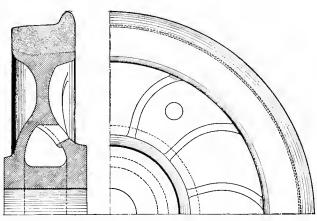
Fused Coach Wheel. Cast Iron Plate Center with Tire Secured by Welding.
